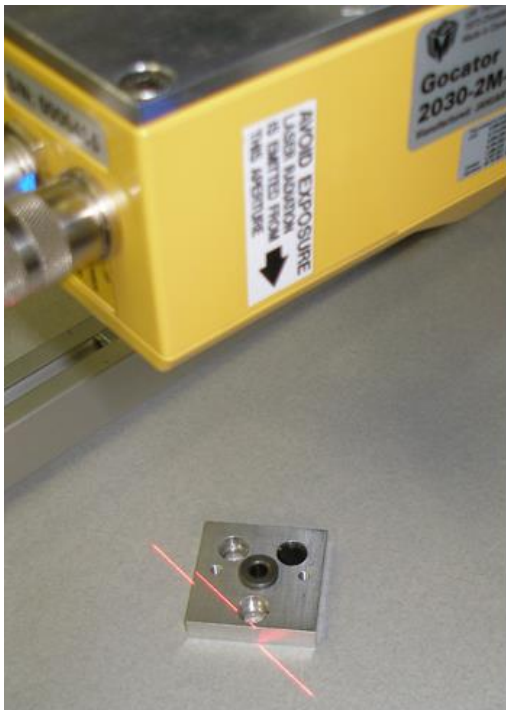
Gocator scanning a part with a rubber plug seated in one hole.
